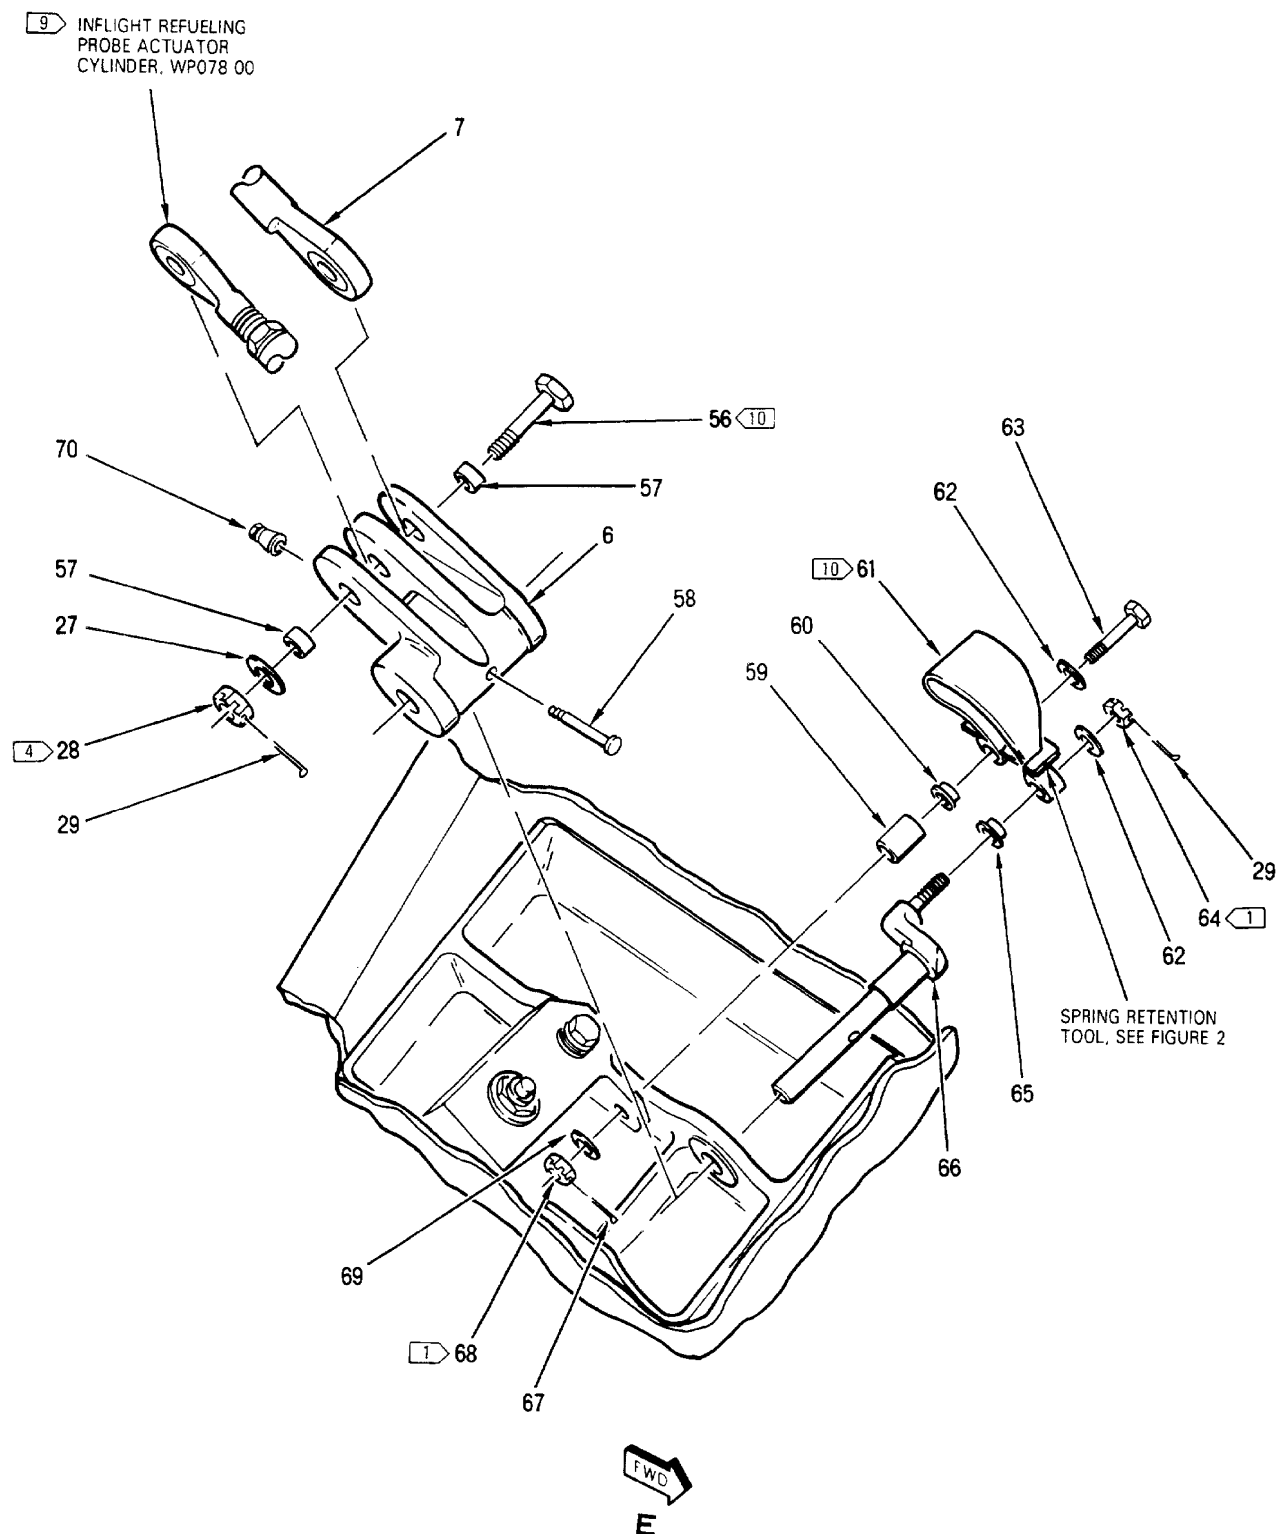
Inflight Refueling Probe and Door Drive Mechanism (Sheet 7)
